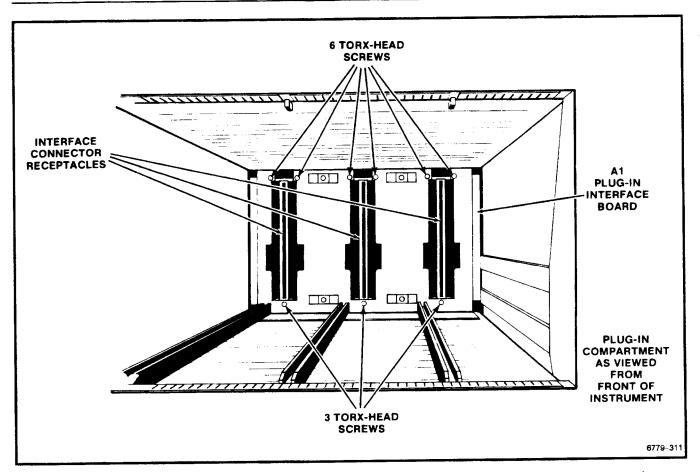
Plug-in compartment showing mounting screws for the A1 Plug-In Interface board.
